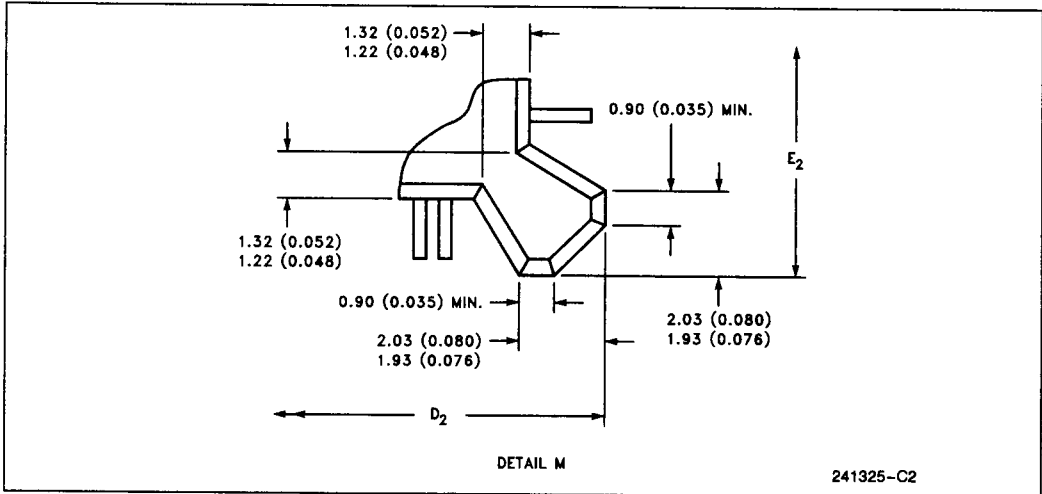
196-Lead PQFP Mechanical Package Detail—Protective Bumper
